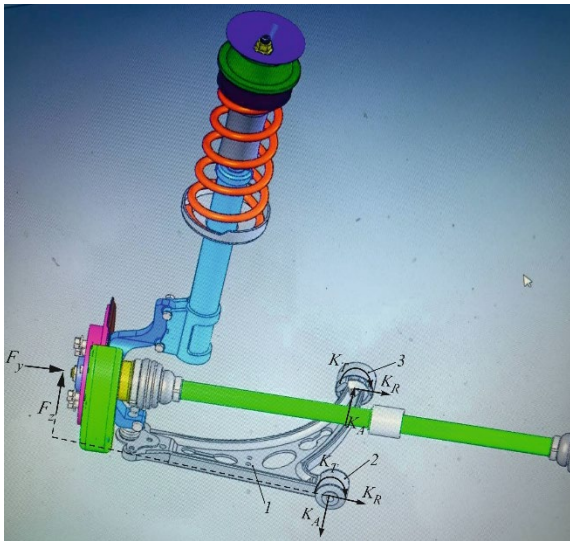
Three-dimensional geometric model of a suspension and radial, axial and torsional stiffness in rubber bushing of an arm.
